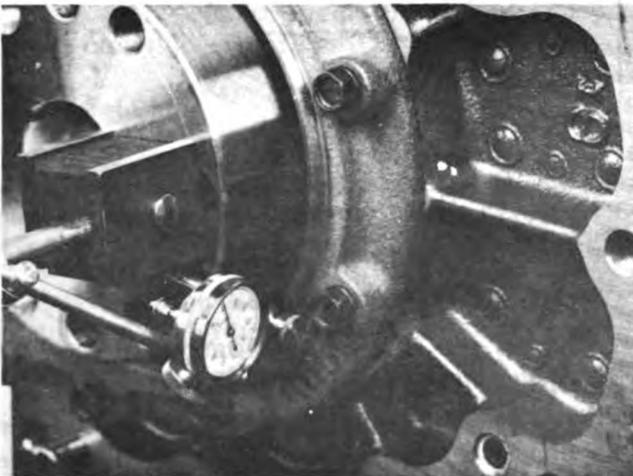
(N114273). Check The Alignment Of The Rear Cover.
